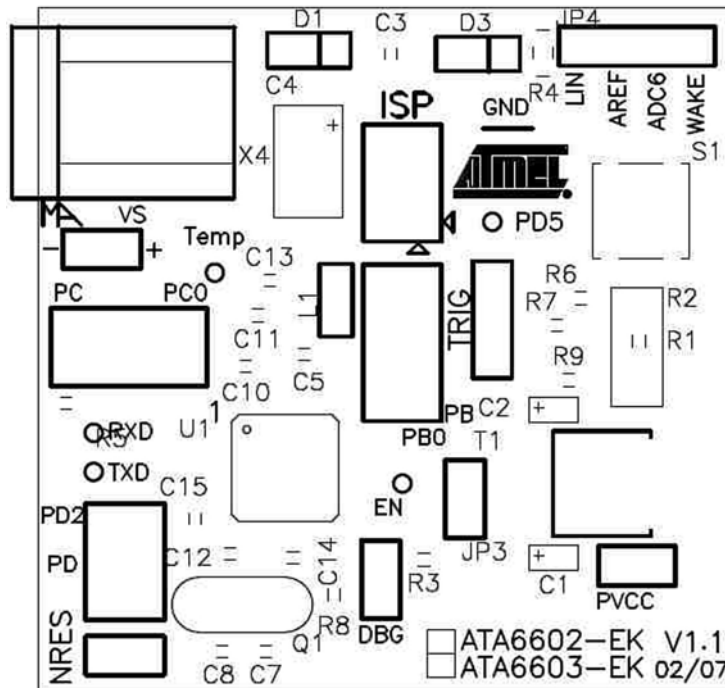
ATA6602/ATA6603 Development Board; Top Side, Top View
